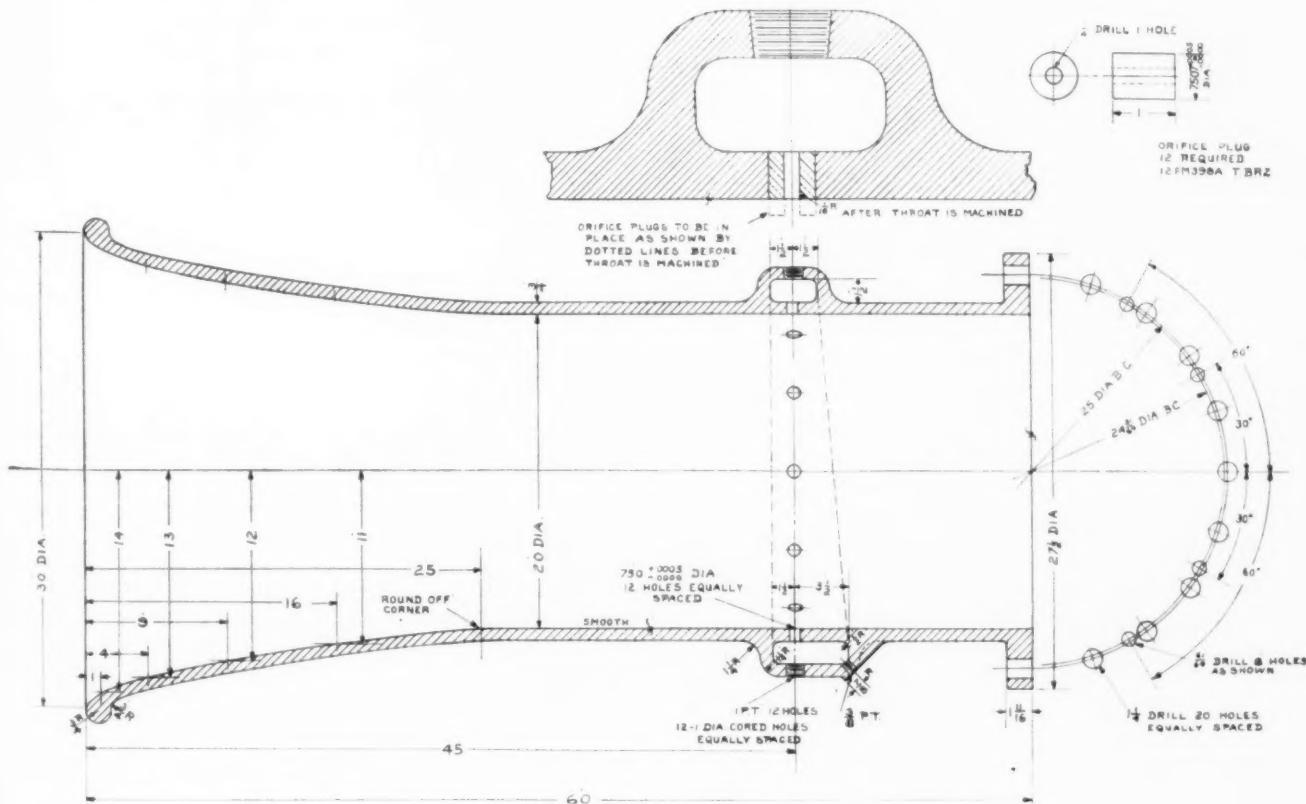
DIMENSIONS OF 20-IN. INTAKE METER
